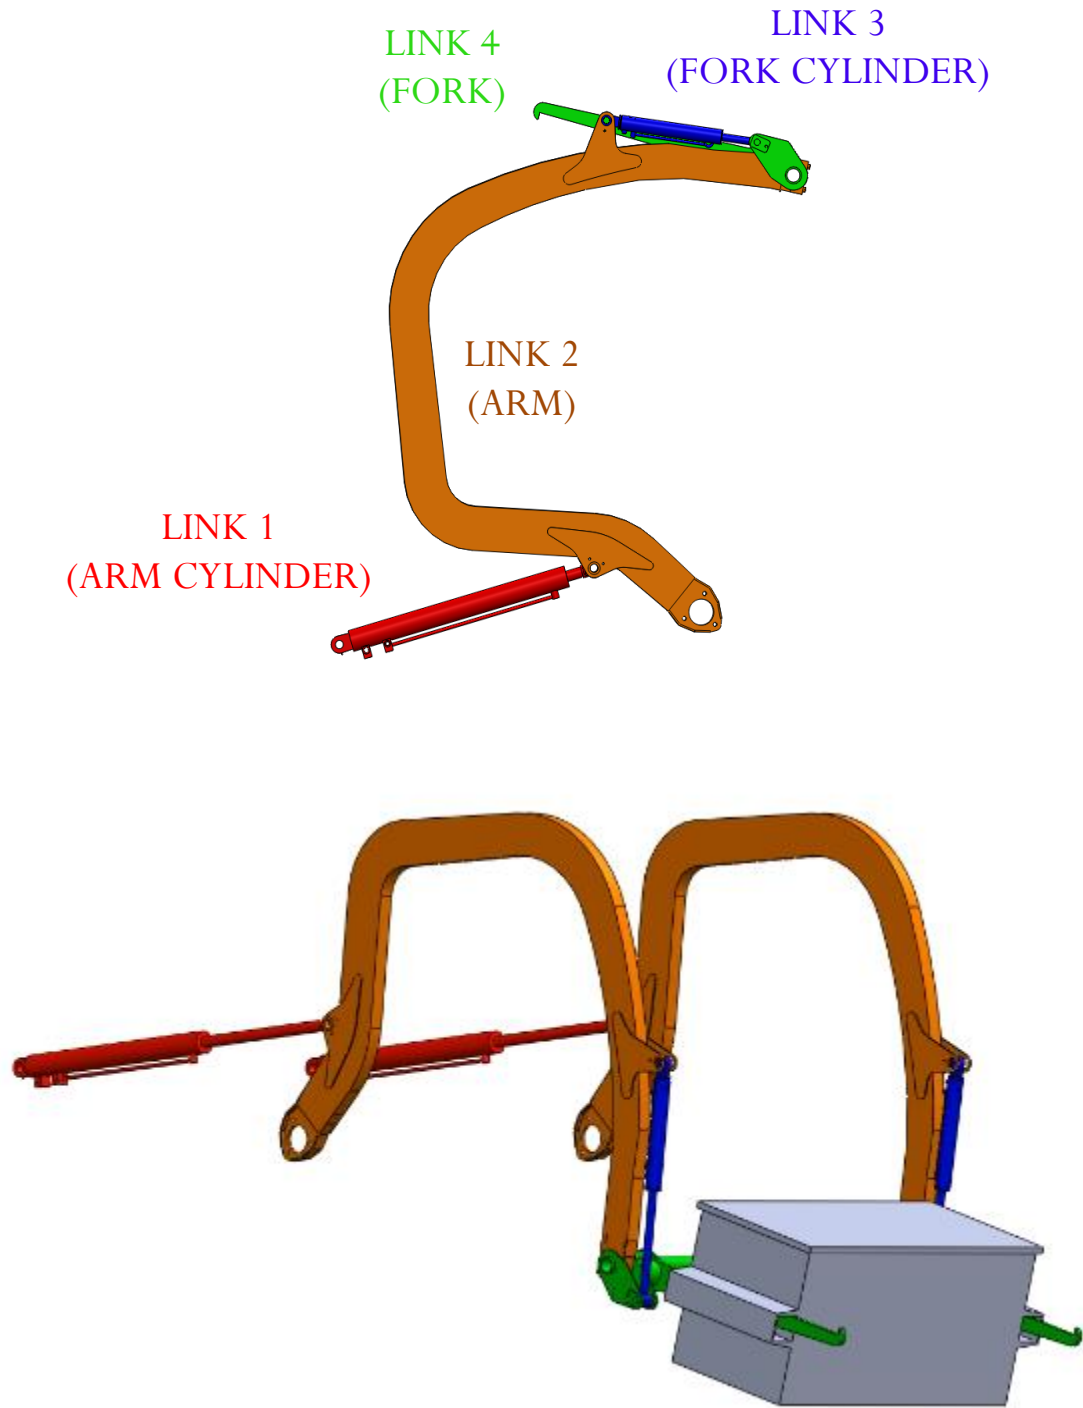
(a) The four links of the arm assembly are listed on a side view. (b) An isometric view shows the full linkage.
